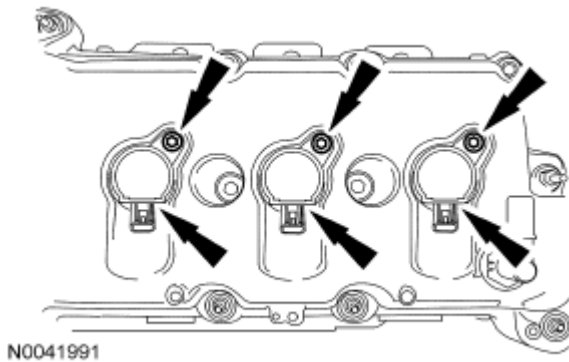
Locating LH Coil-On-Plug Assemblies And Bolts
